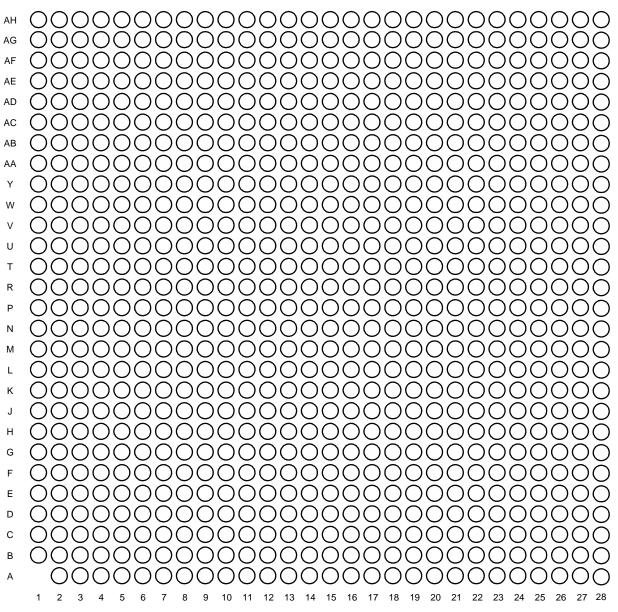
MSC8144 FC-PBGA Package, Bottom View
